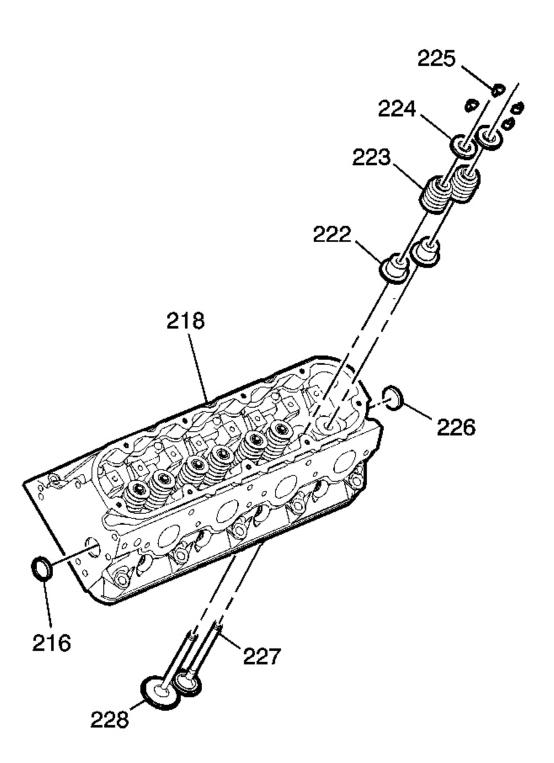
View Of Cylinder Head Components Courtesy of GENERAL MOTORS CORP.
